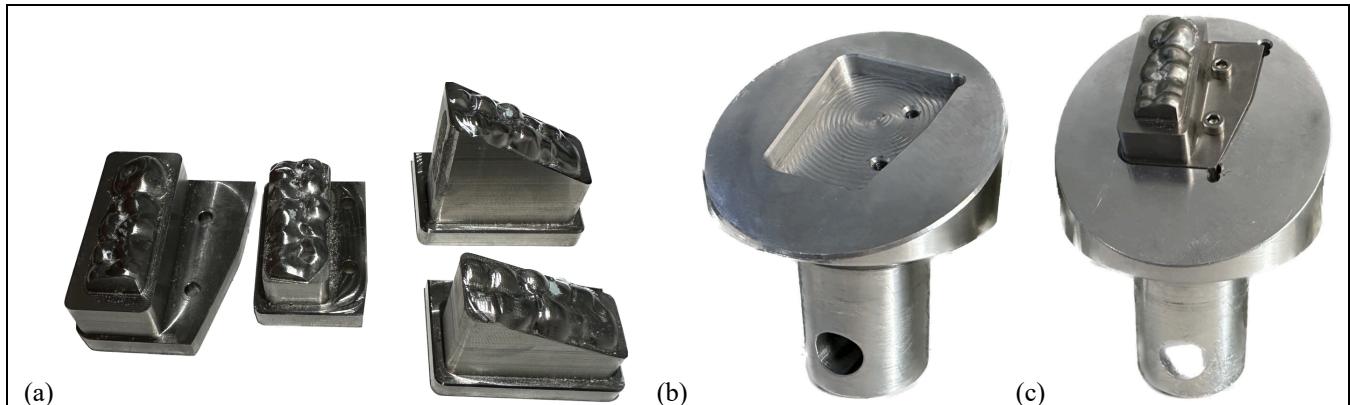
Overall machining process after producing engineering drawings on Siemens NX.
